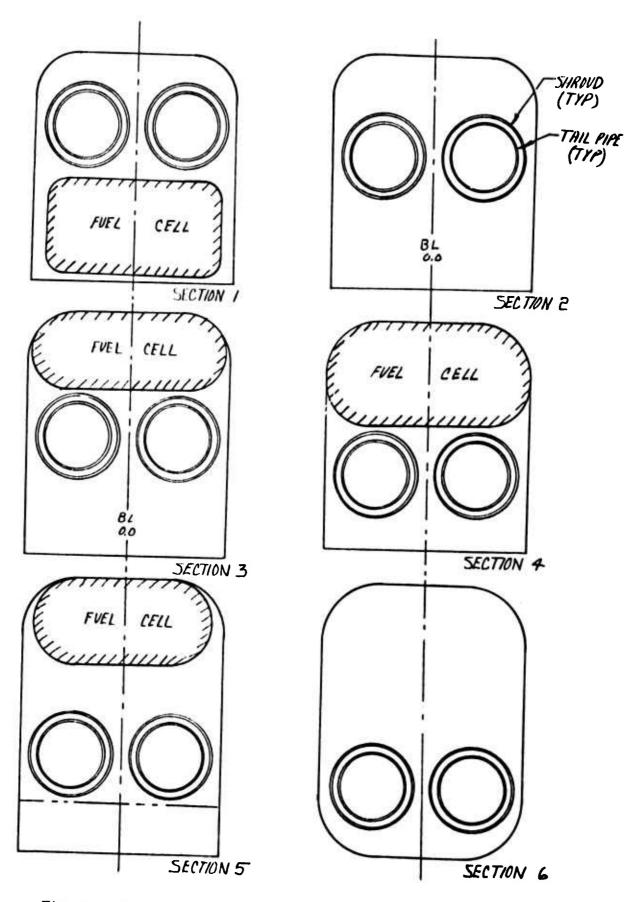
Heating and Cooling Schematic - Aft Fuselage Sections
